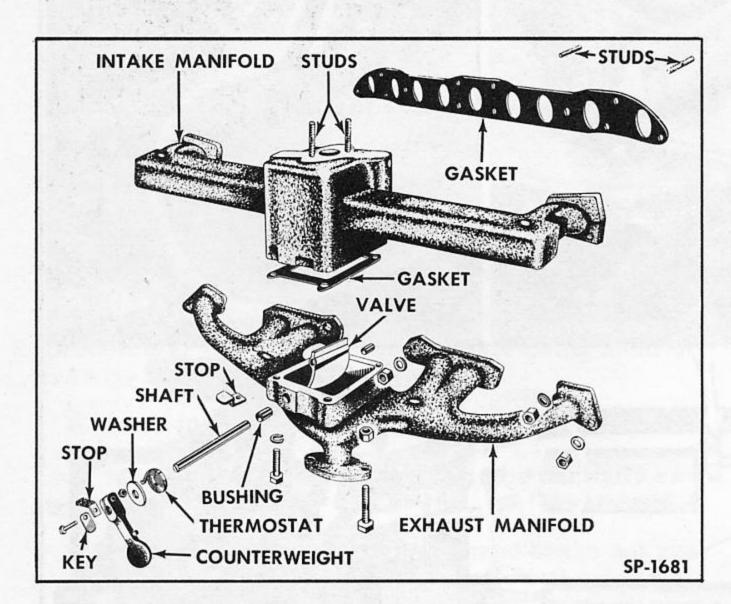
Exhaust and Intake Manifolds—6 Cylinder— Exploded View
